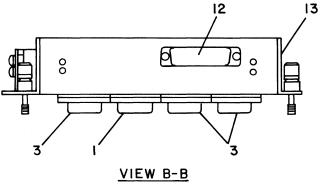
CAPSTAN DRIVE ASSEMBLY A10
